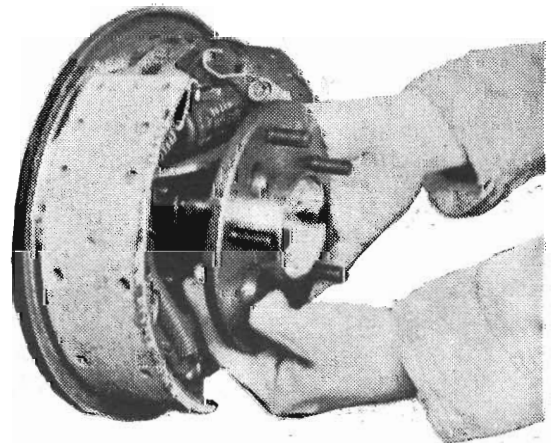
Carefully positioning the seal and cup "rib-ring"
